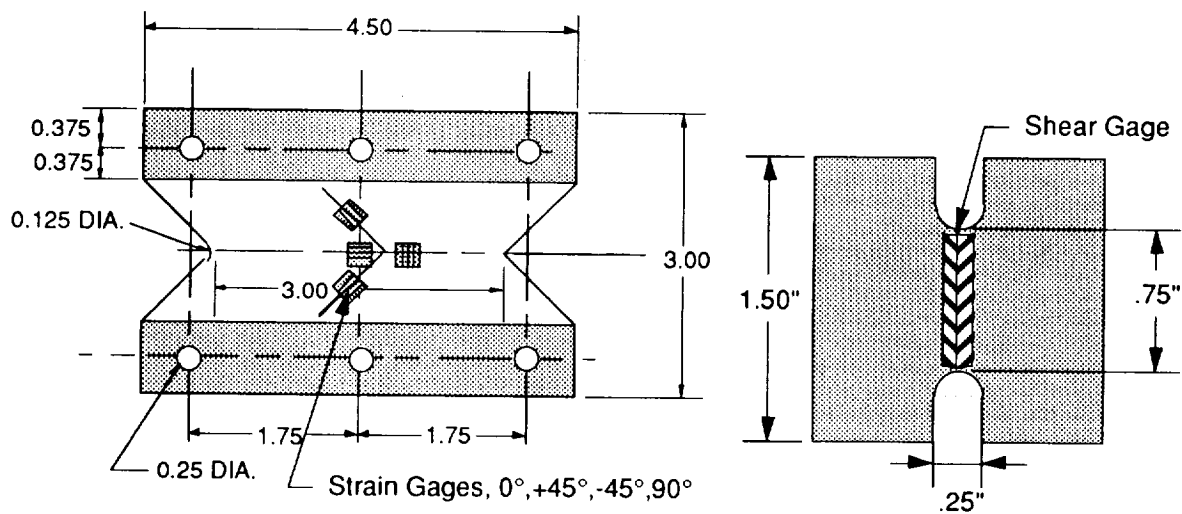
Rail Shear Specimen and Compact Shear Specimen.
